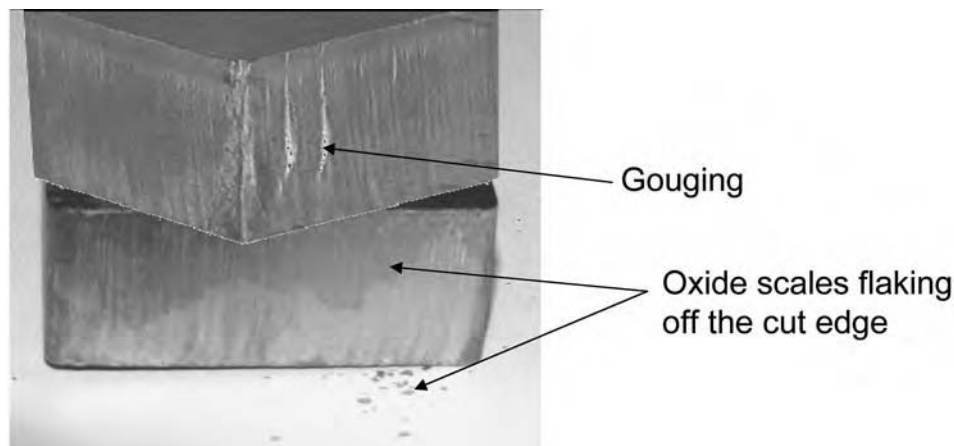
Oxide scales cut with O₂ assist gas have a shiny, dark-blue appearance and flake off from the cut edge. They are detrimental to downstream painting and welding operations. Gouging leaves deep crevices that flare in the direction of the assist gas flow; they usually indicate excess heat from too much laser power or too much O₂ flow rate.
